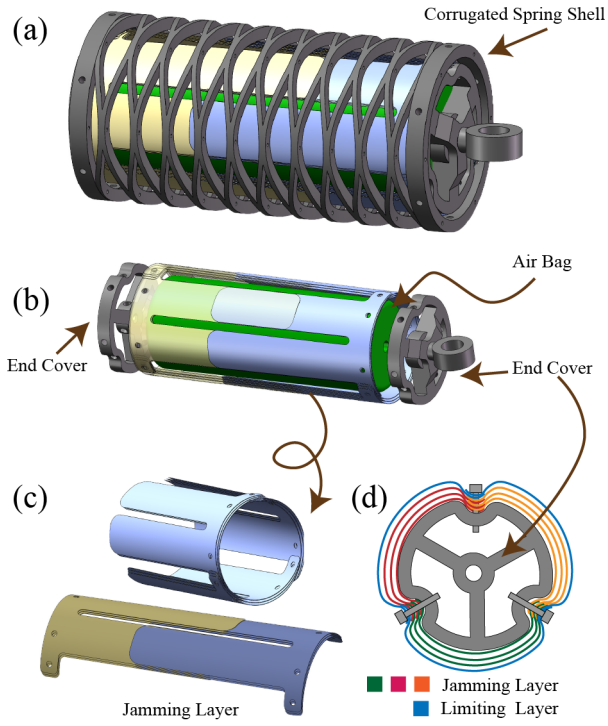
Overall Structure and Assembly Details. (a) Complete variable stiffness structure. (b) Exploded view of the unit. (c) Jamming plates stacking and assembly method. (d) Interlayer configuration and end-cover connection.
